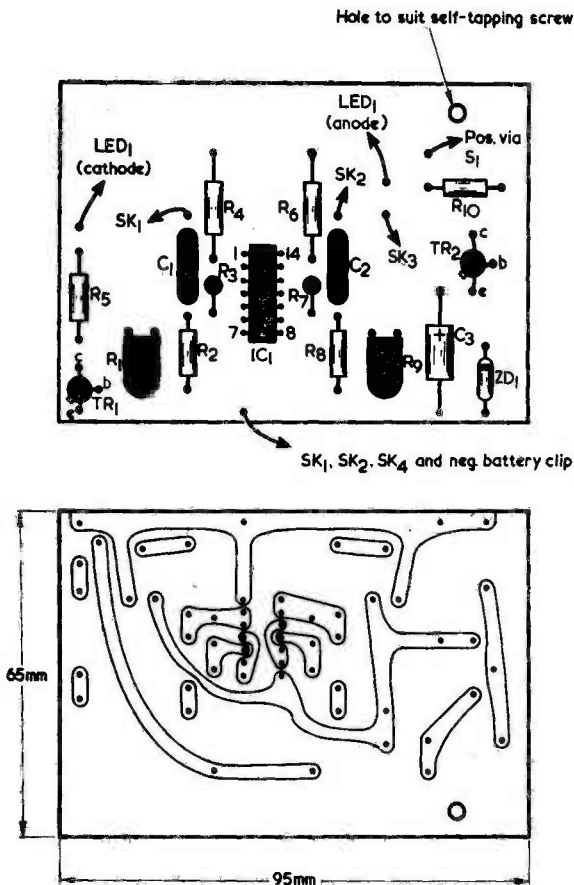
Component and copper sides of the printed circuit board. The self-tapping screw employed for mounting is provided with the box specified
